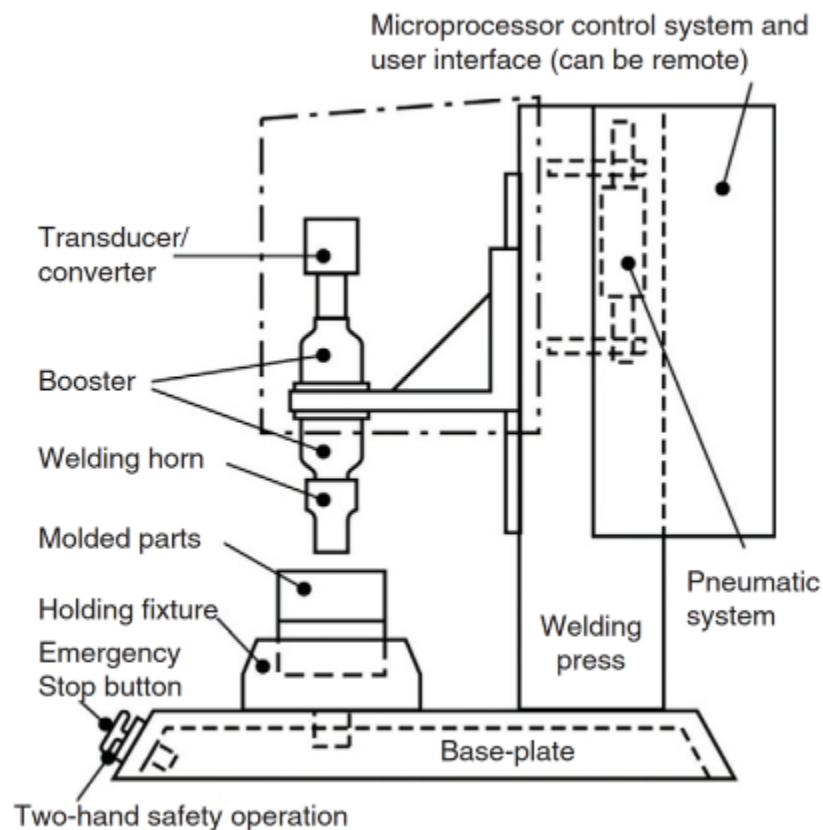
Schematic representation of a commercially available ultrasonic welding machine [22].
